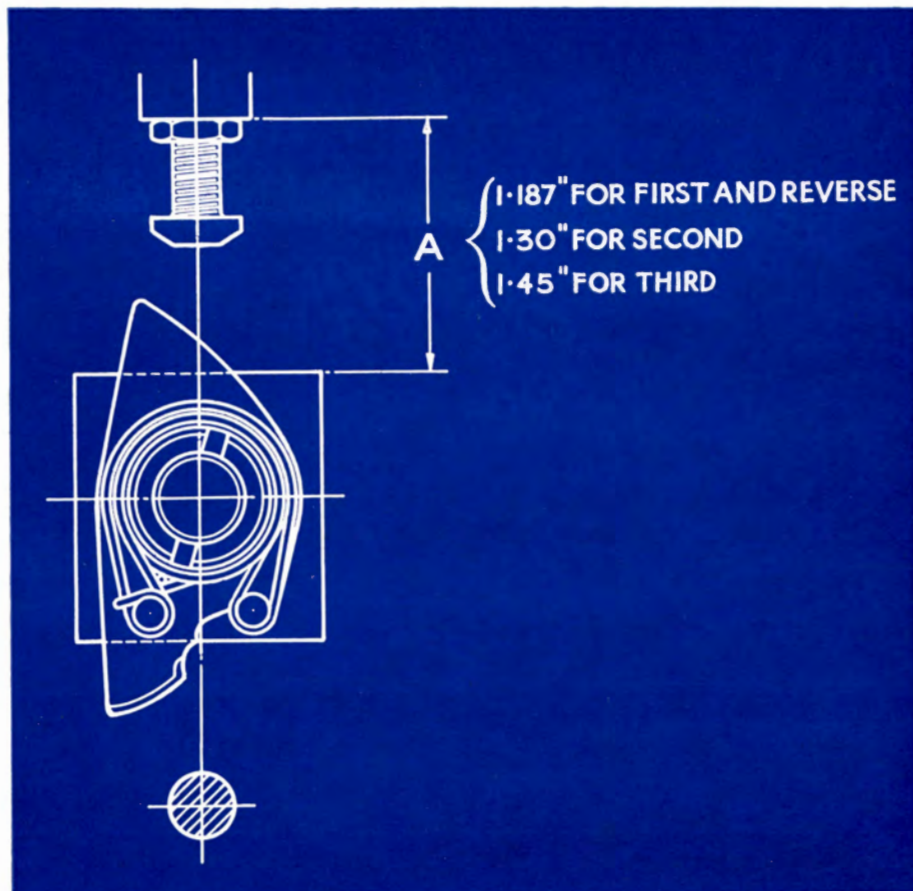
SETTING DIMENSIONS FOR THE AUTOMATIC ADJUSTERS
